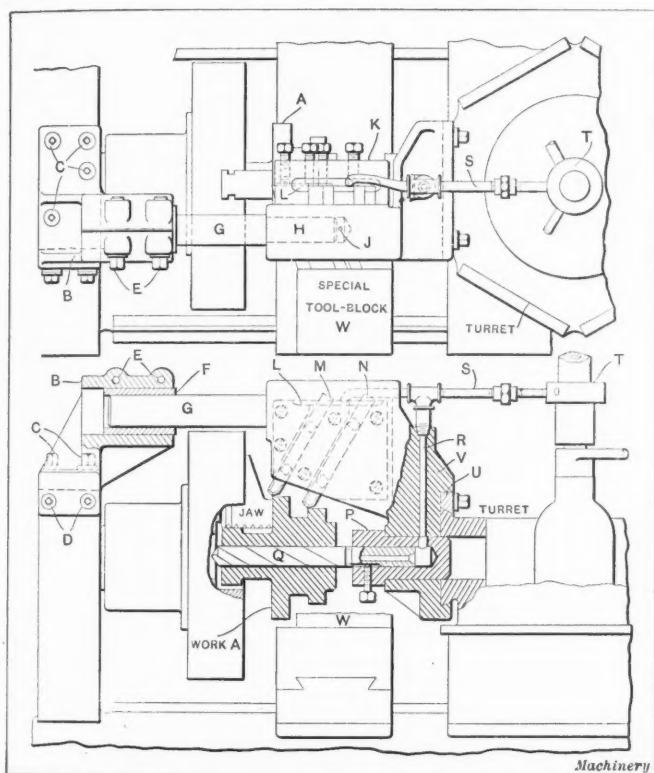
Piloted Multiple Turning Tool for Gear Blanks
